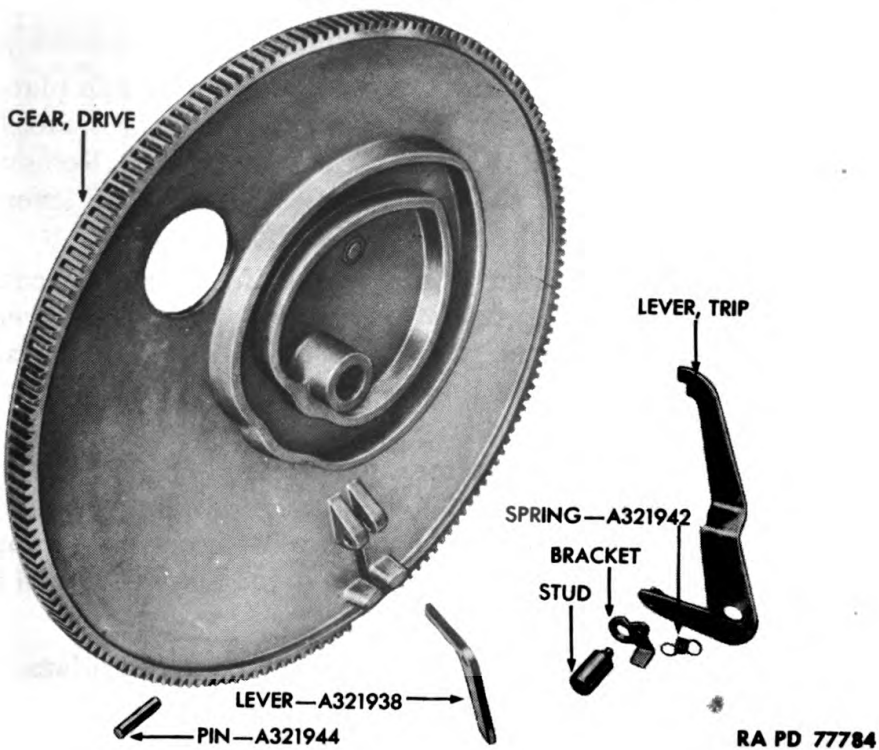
Removal of Clutch Engagement Lever From Drive Gear
